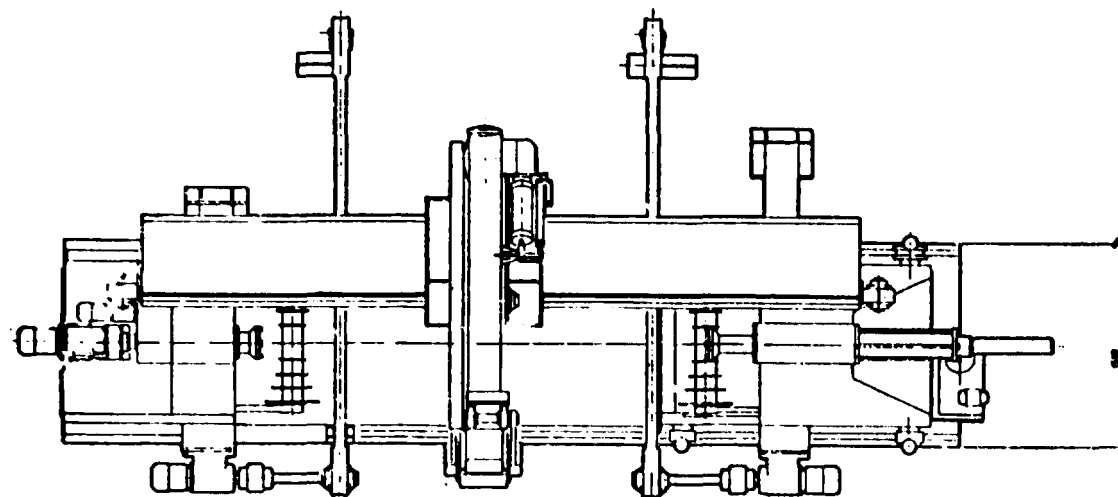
Debarking machine. The log is rotated by a set of discs mounted on parallel shafts
